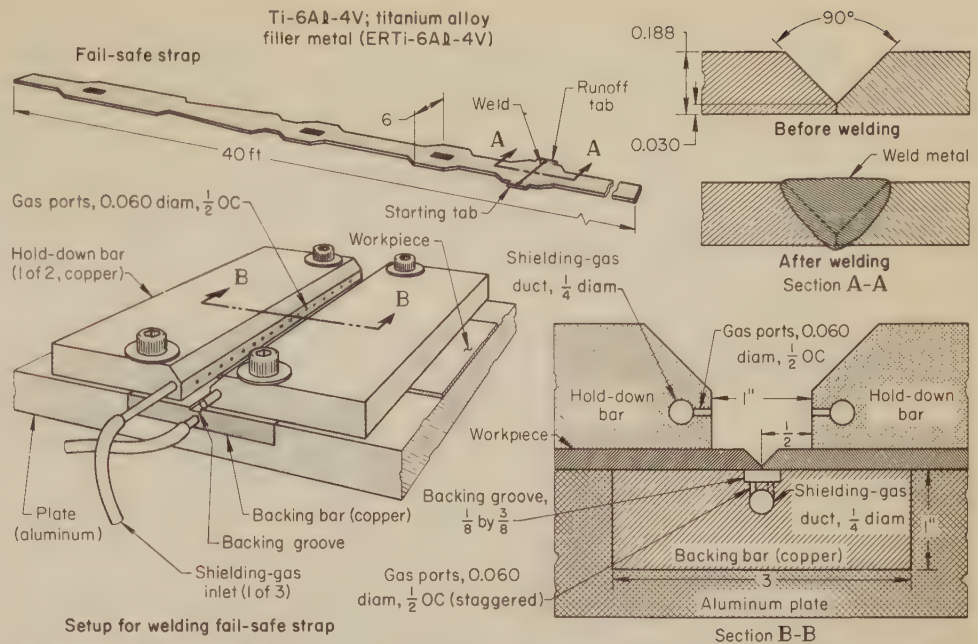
Tooling setup for supplying shielding gas to the weld area for gas tungsten-arc welding of the military fail-safe strap shown (Example 360)
